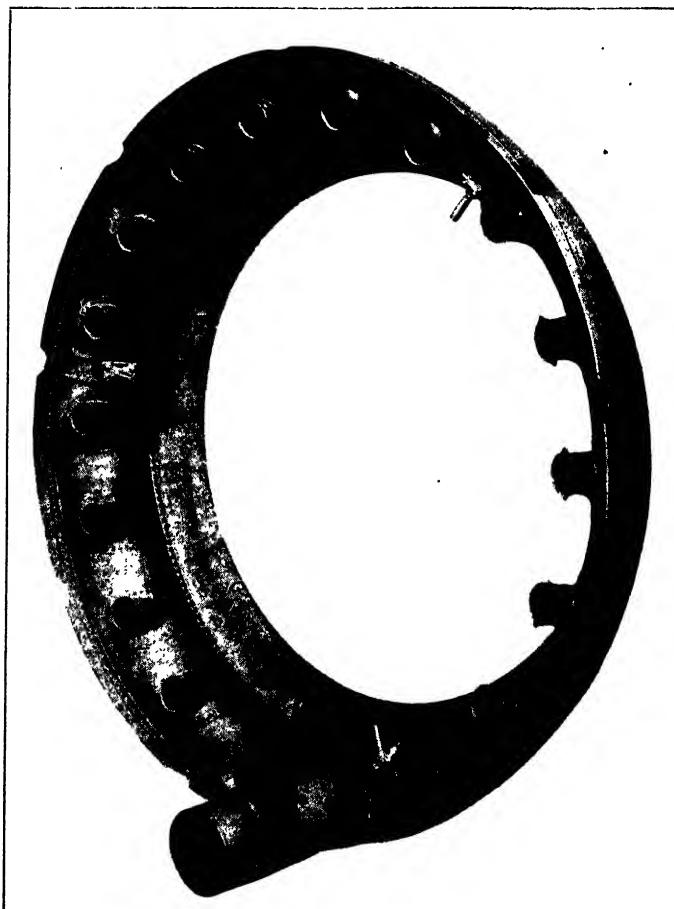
Single Outlet Exhaust Ring (Large Diameter).
